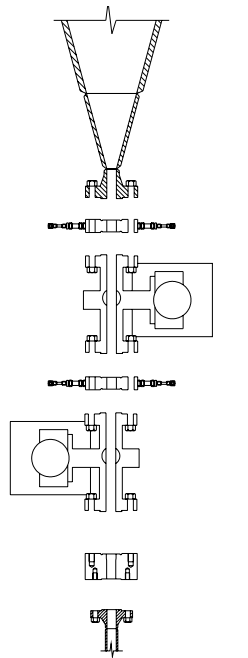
Discharge Tank Valve Spool Sub-Assembly (Drawings 7R109718)
